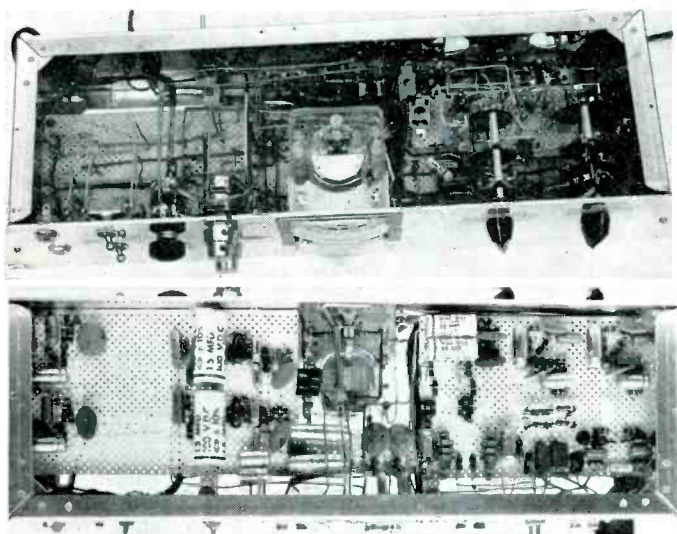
Top view (left) and bottom view (right) of amplifier assembly.
